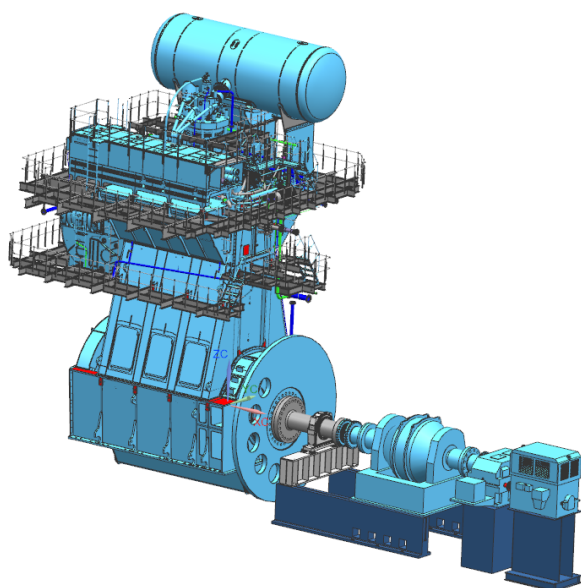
3D representation of the SCE920, with the water brake, gear box, and e-motor on the right side
